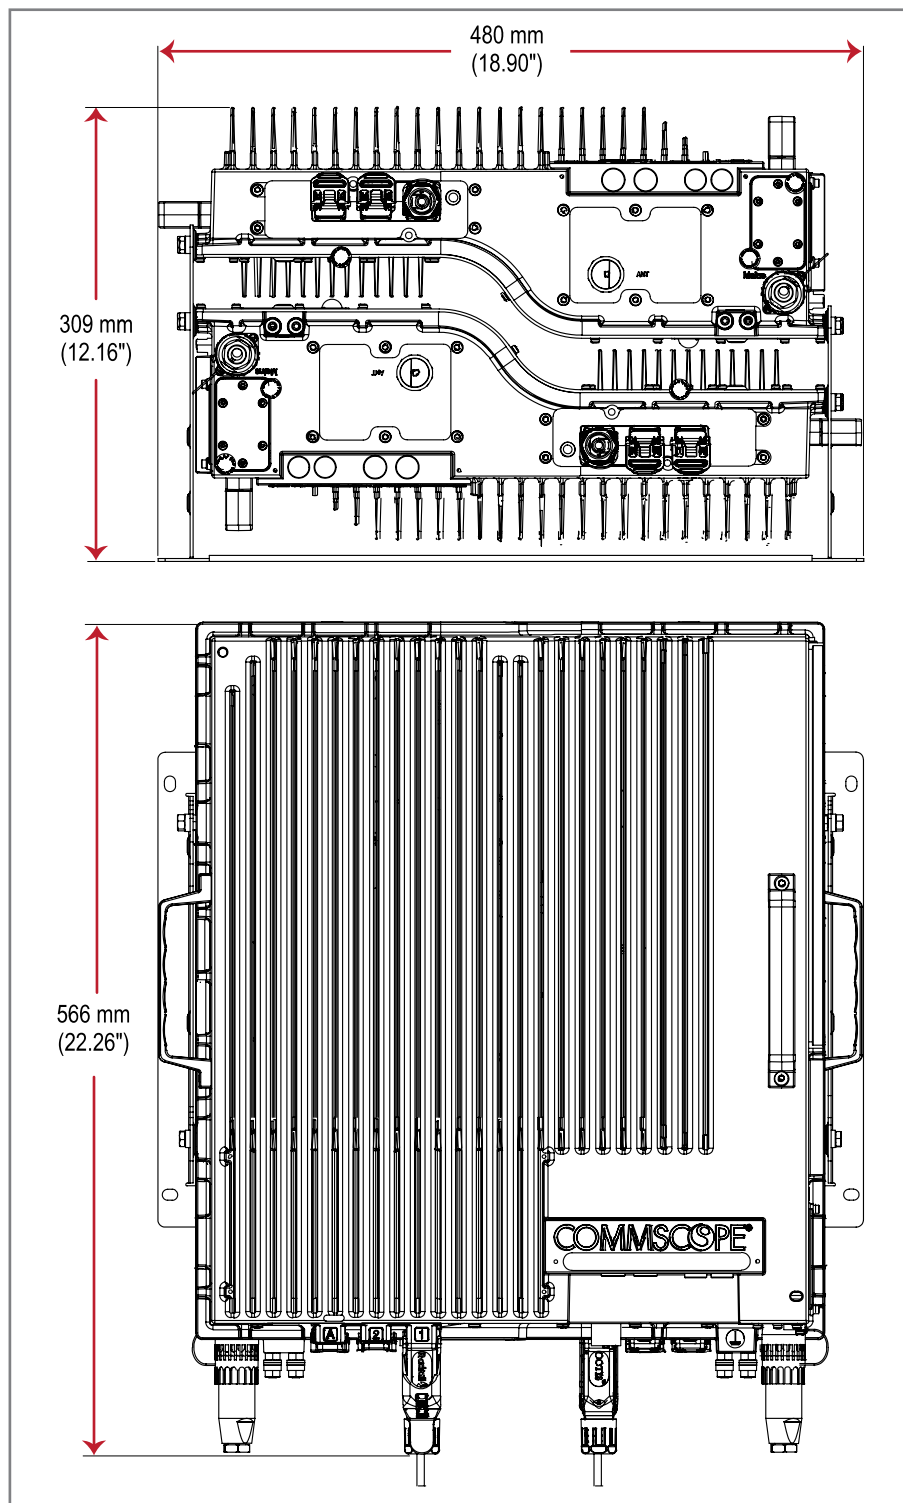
Mounting Dimensions for the Dual Mounting Bracket without Splice Box
